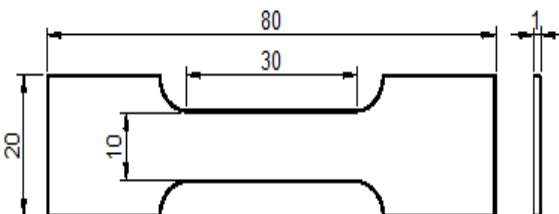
Configuration of fatigue test specimen(unit : mm)
